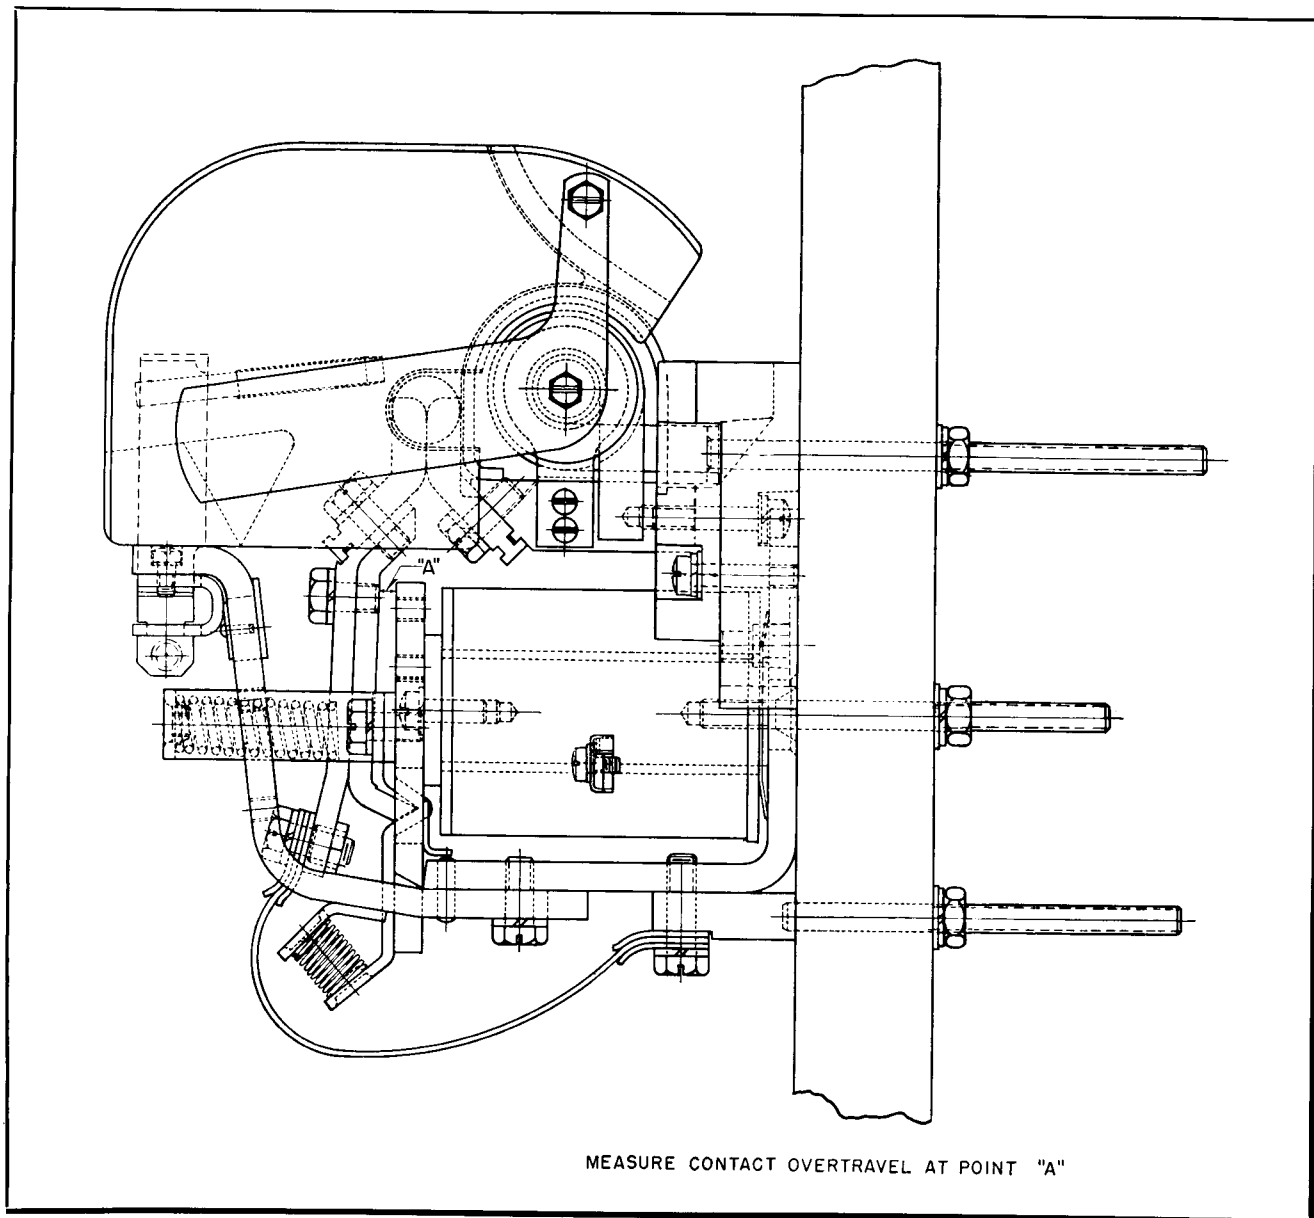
Sectional View of Type M-410 Contactor with Armature Closed
